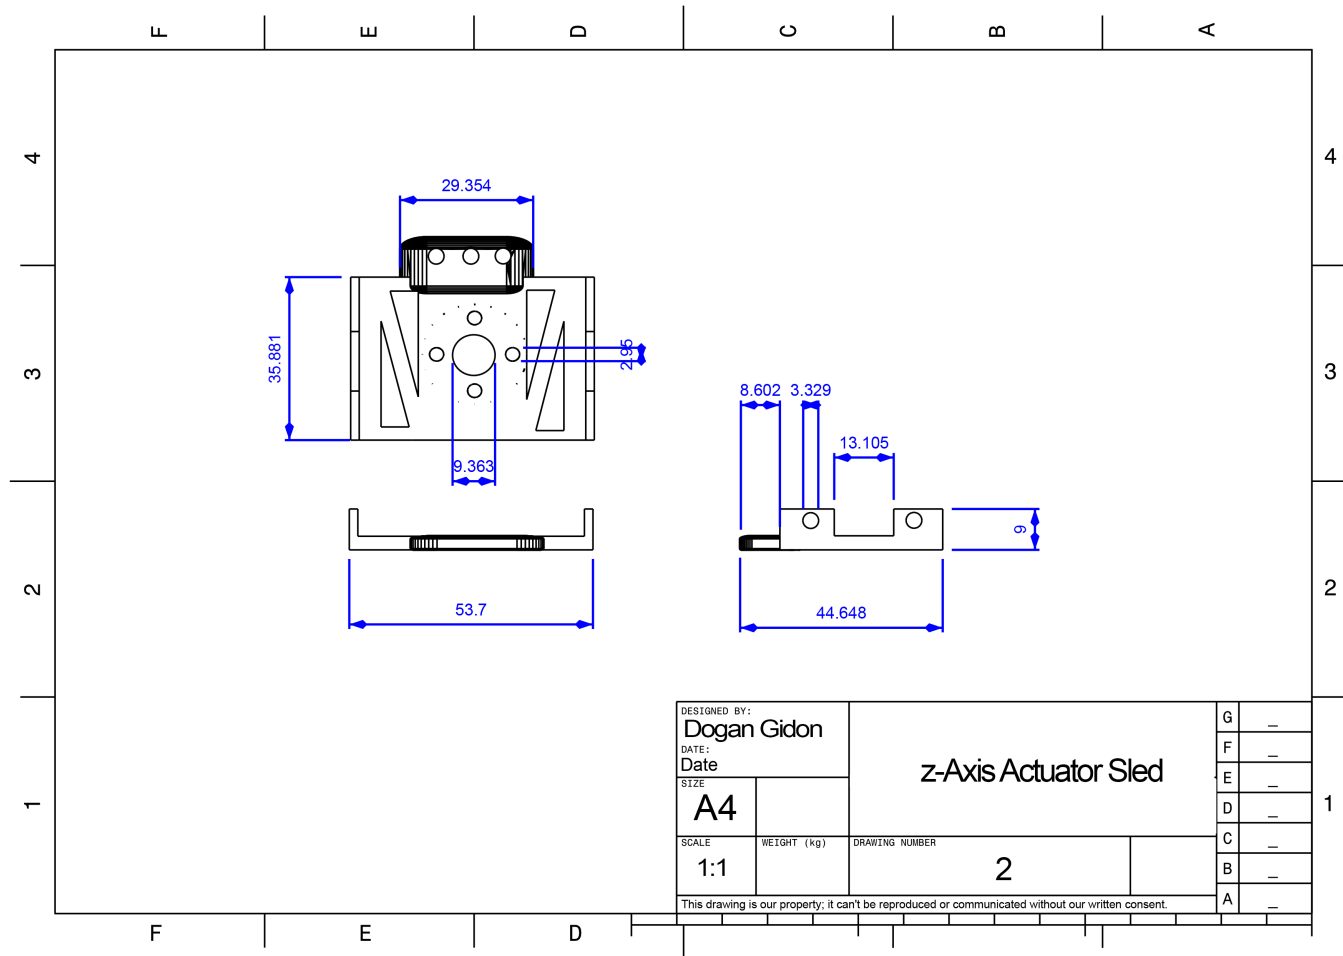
Technical drawing depicting the first part of the z-axis holder assembly. The lead screw is situated in the center hole. The extension with three holes allows different parts to be fixed to the z-axis gantry.
